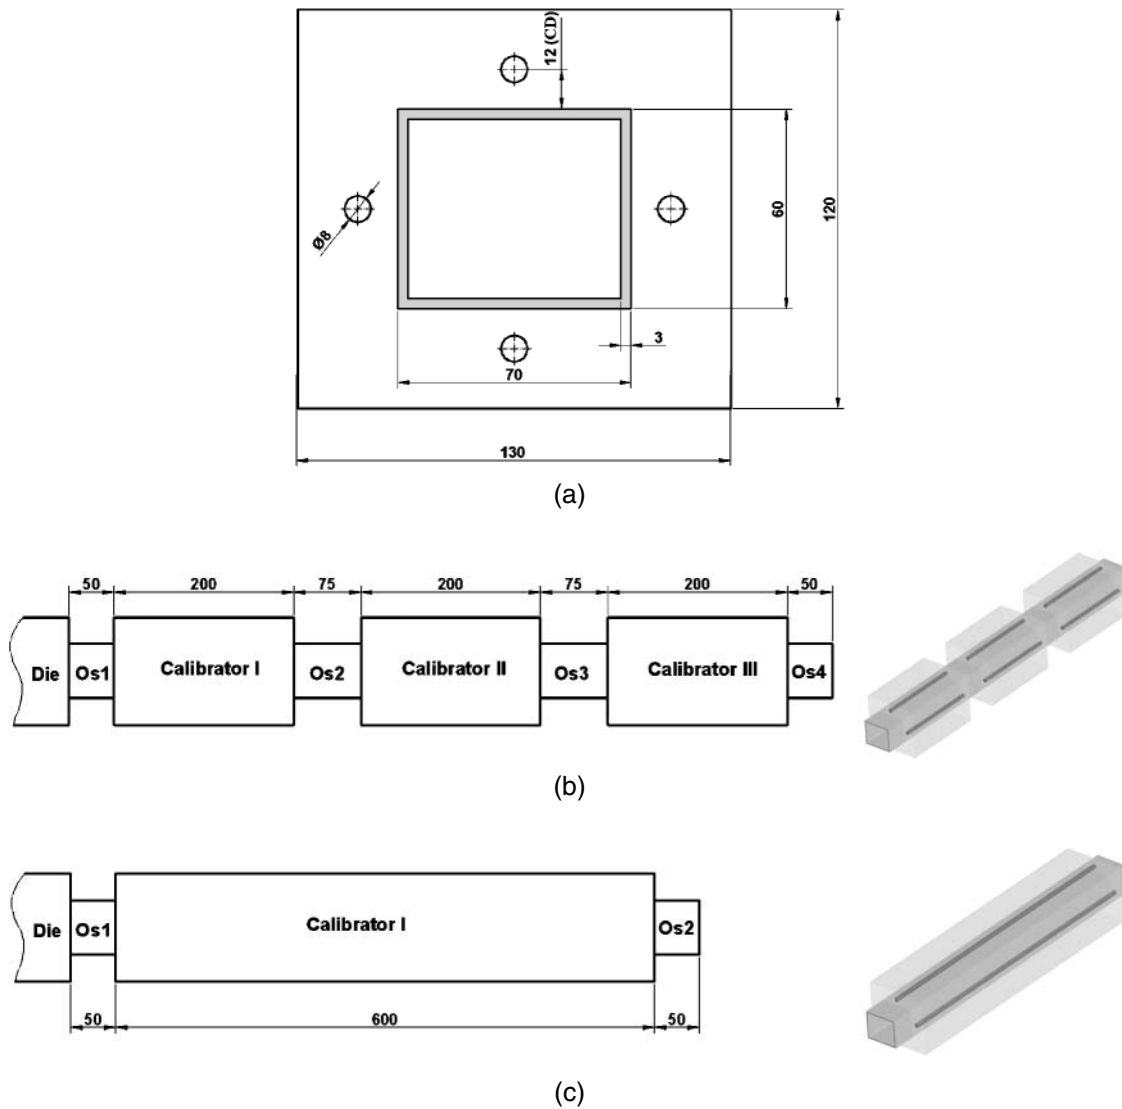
Cooling of a rectangular hollow profile problem (dimensions in mm): cross-section geometry (a), three-calibrator layout (b), and one-calibrator layout (c).
